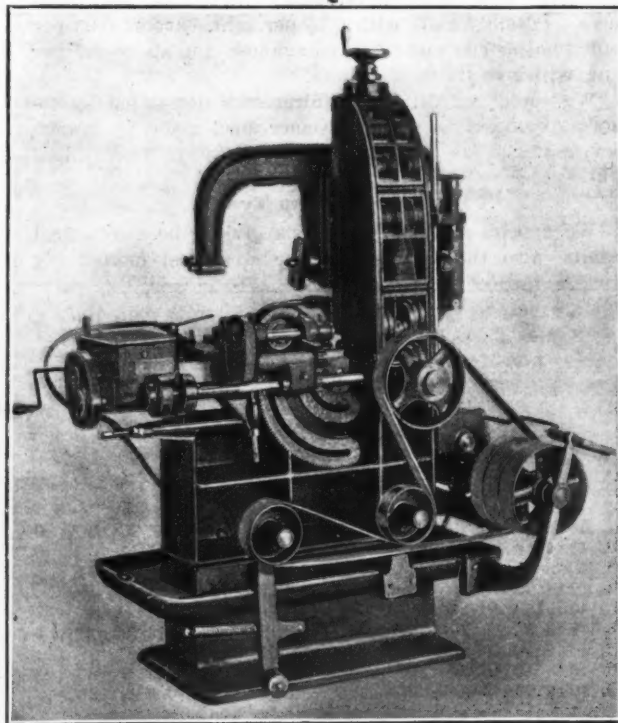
A View of the Opposite Side of the No. 2B Gear Cutter, Showing the Drive.
